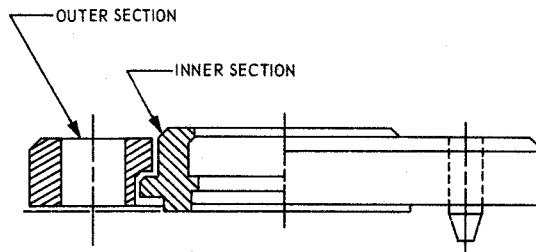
Cut-Away View of Rotatable (Swivel) Flange
